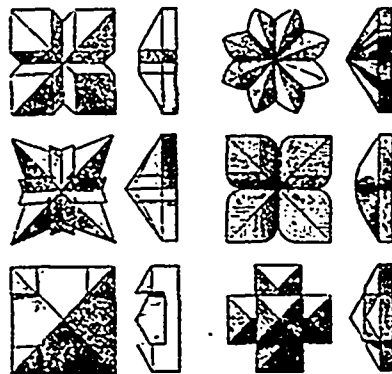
SPECIMENS OF WORK PRODUCED BY ATTACHMENT.
